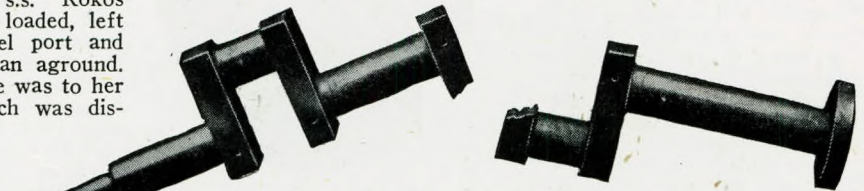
This crankshaft is part of the propelling engine of a motor tug. It was removed in two pieces; one of the inner webs had fractured.
